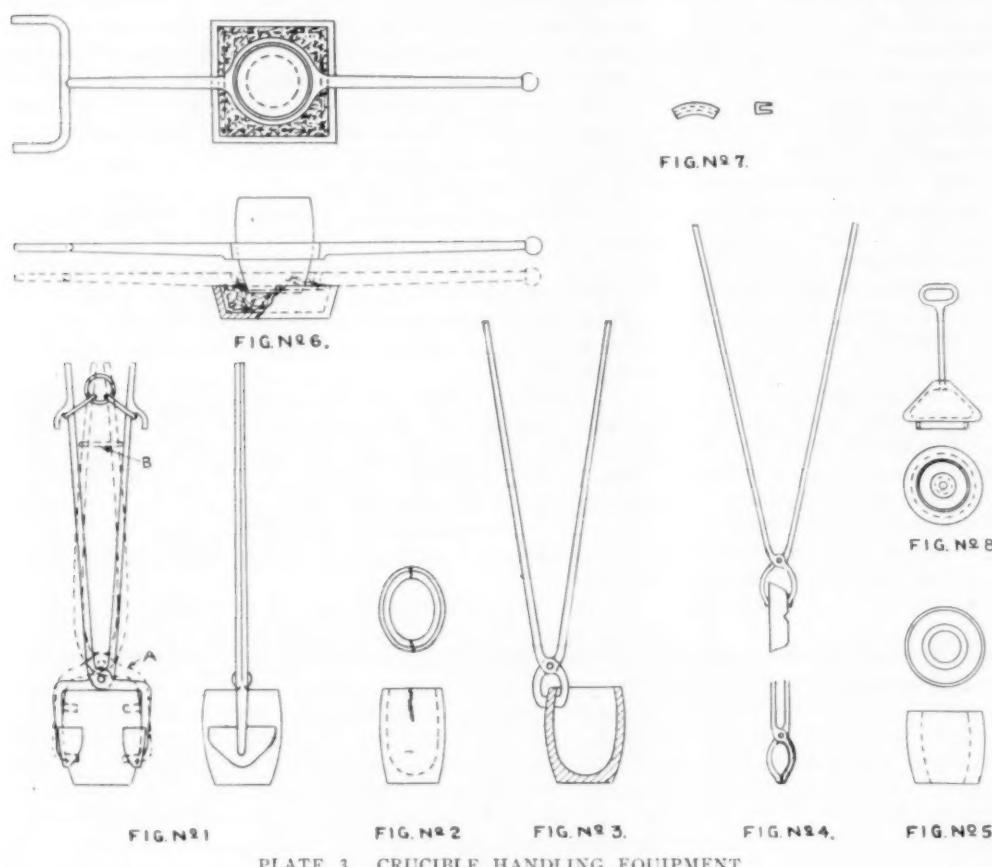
CRUCIBLE HANDLING EQUIPMENT
